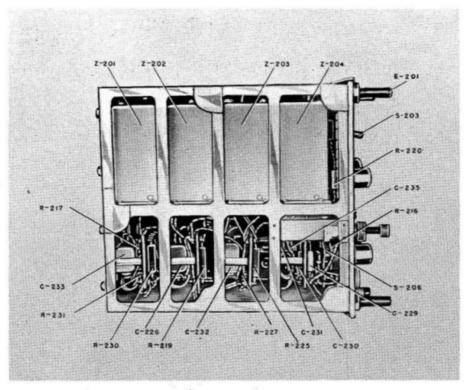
Receiver Unit — Left End Open View (older model shown; see note for Fig. 1)
